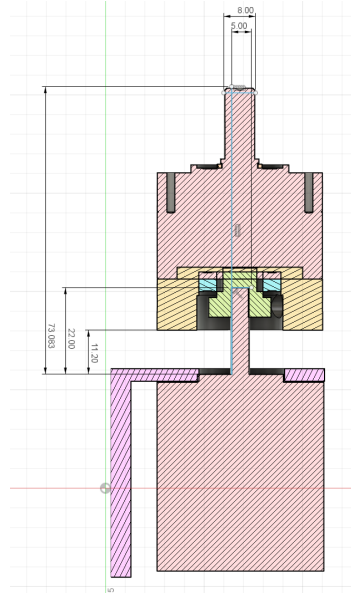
Crane base rotational stepper motor (bottom) and gearbox (top). CAD image courtesy of Alec S.
